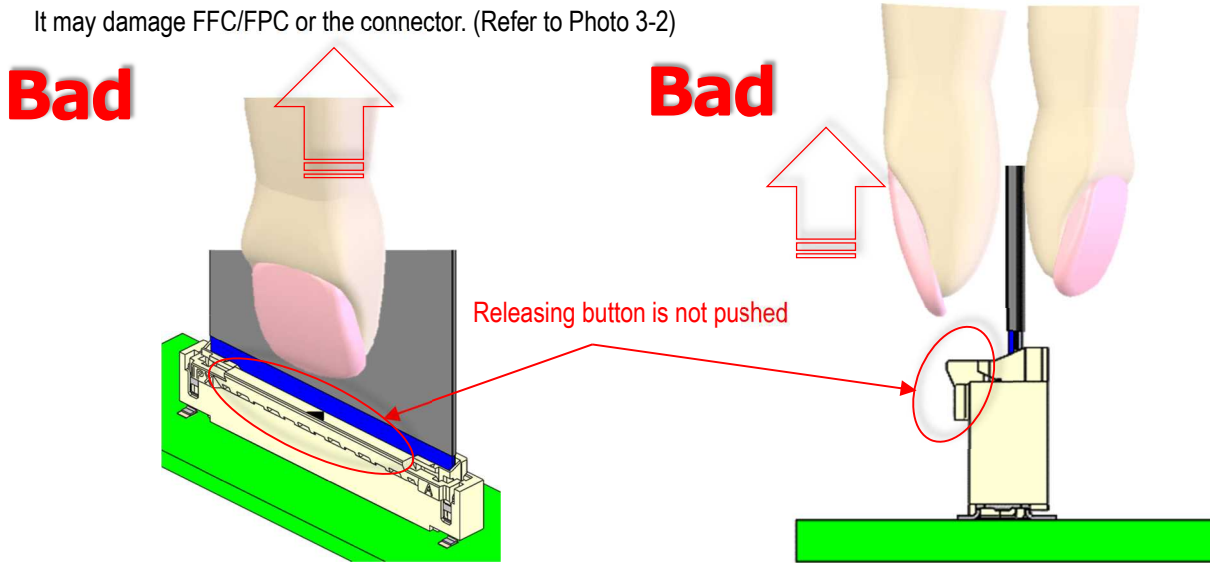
Withdrawing FFC/FPC without Pushing Release Button
